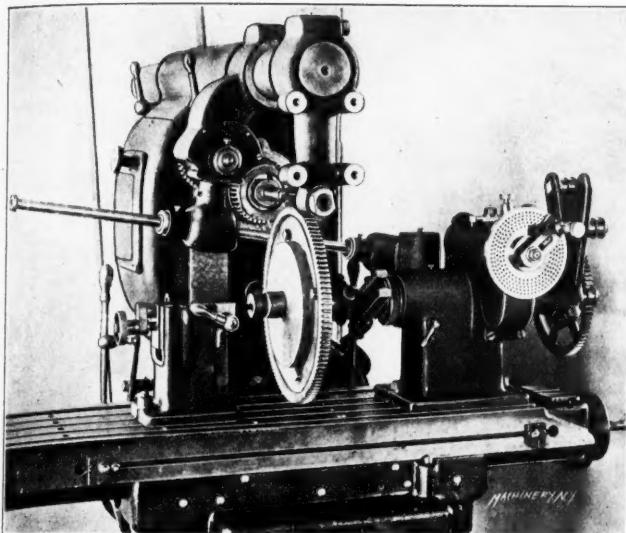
Hobbing Attachment for the LeBlond Milling Machine Cutting a Large Worm-wheel.
